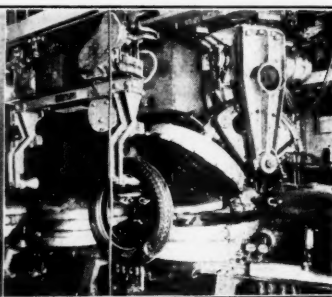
Jacket Mold for Vulcanizing Tires with Conveyor
